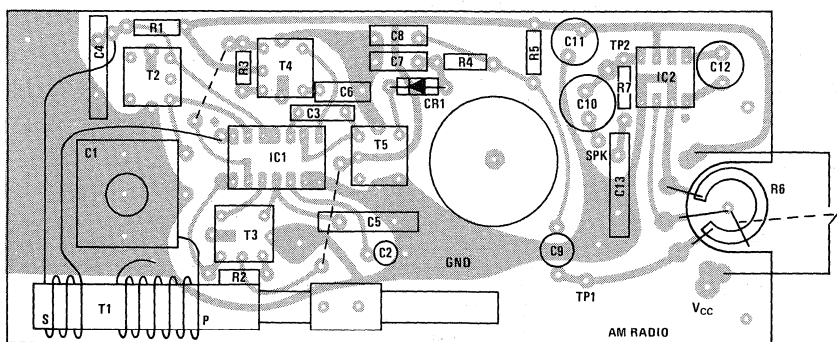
Typical Printed Circuit Board Radio Layout (Bottom View)
